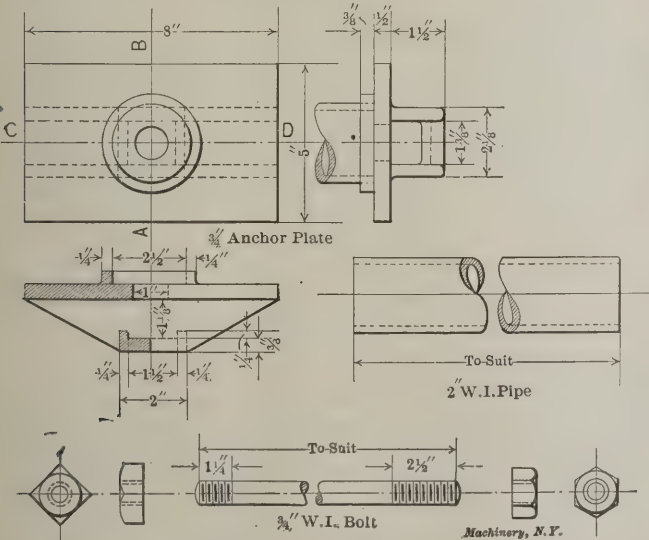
Improved Anchor Plate for Square Nut and Threaded Rod.
